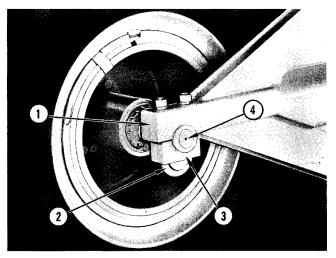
OUTER AXLE MOUNT 1. Axle Mount 3. Block 2. "U" Bolt 4. Axle
